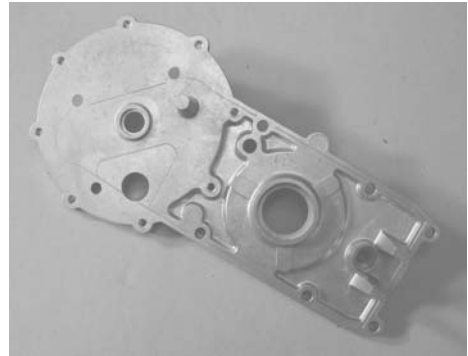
58-62 FI Fuel Meter Cover Bottom View
